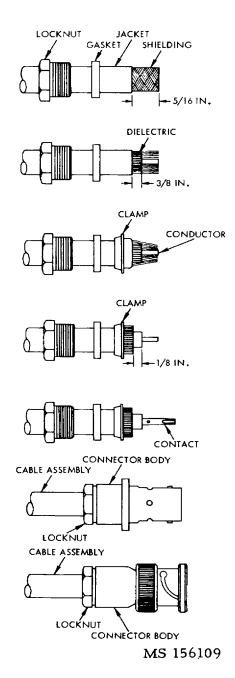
Terminating a coaxial cable, using an improved BNC series connector.
